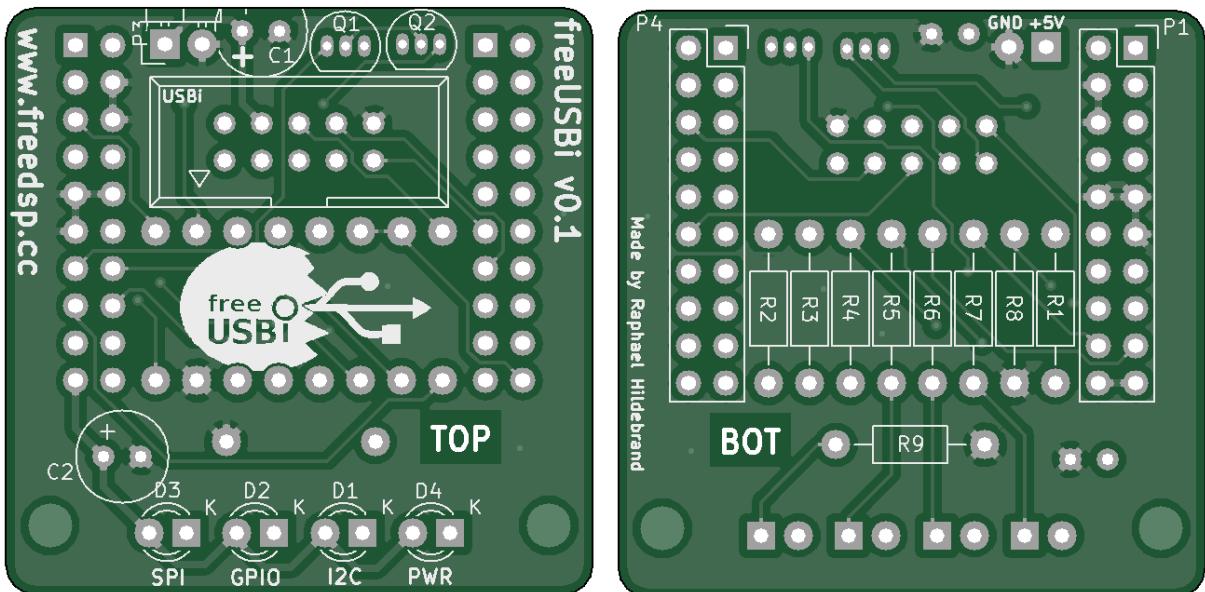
Board silkscreen and parts placement for free USBi 0.1.
